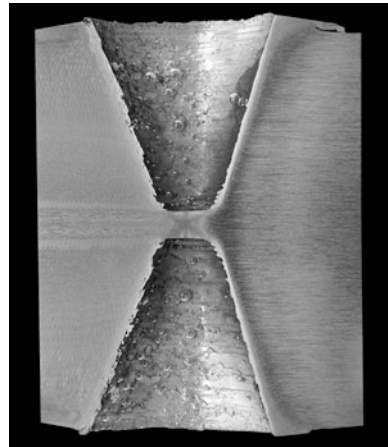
Simultaneous welding with probe gap (longitudinal weld section). 'Reproduced courtesy of TWI Ltd'
